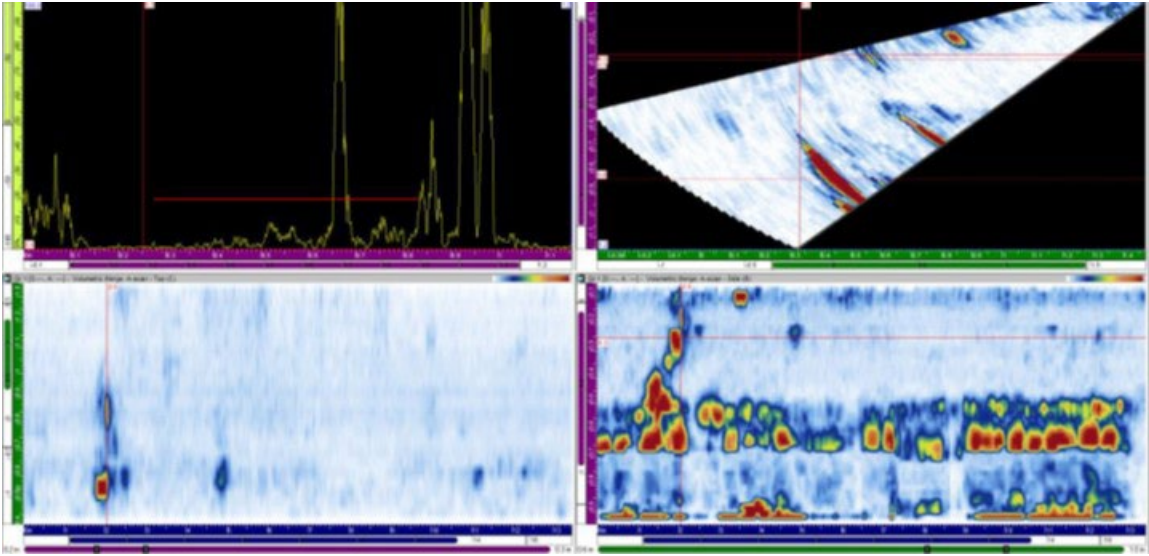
PAUT Results showing flaw indications in the MGL-3 fillet weld test panel
